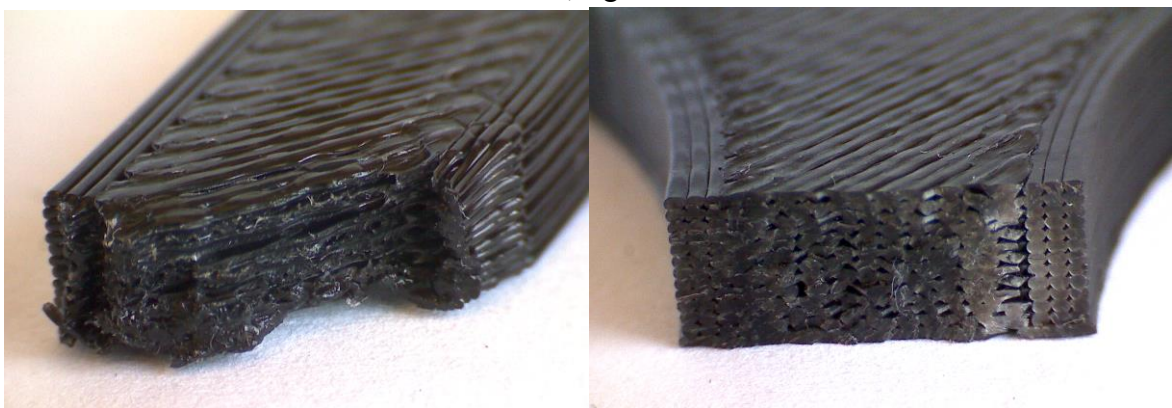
Fractures of PET, left, and PLA to the right. Printing settings used see table 2 and 4
